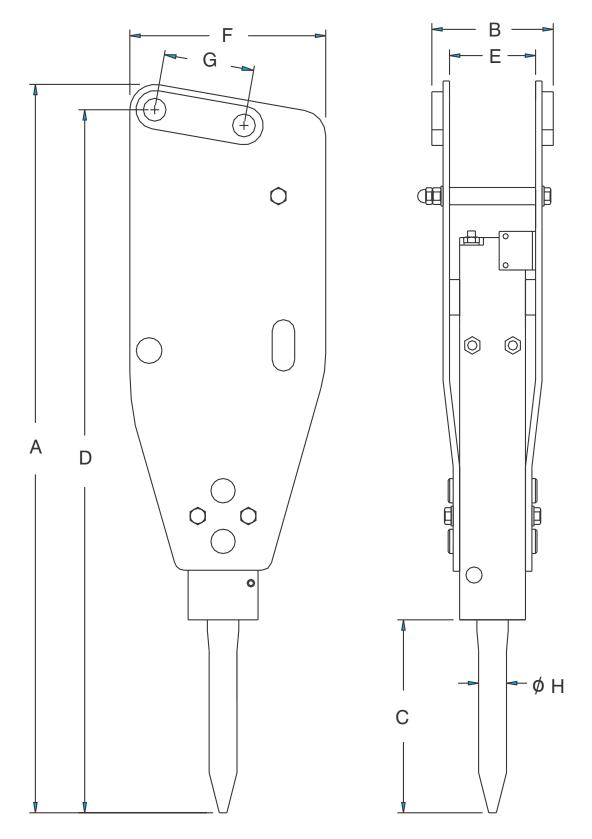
Dimension Drawing - Model AR 48 2-Position Skid Steer Configuration (SSU-2)
